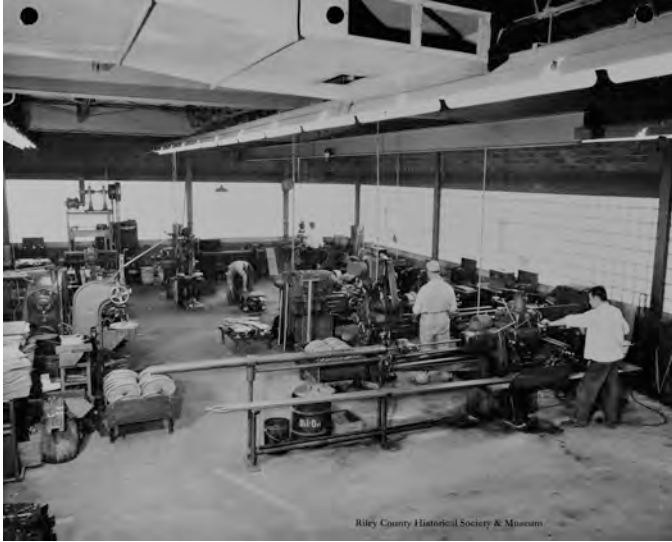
Undated Interior Views of Viking Manufacturing Co. Building
